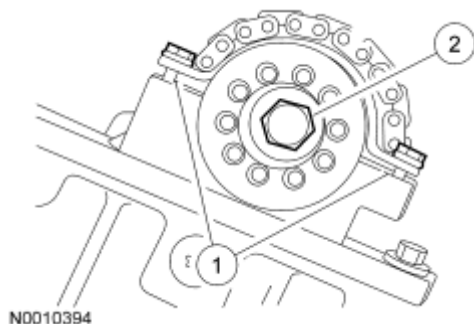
Identifying Camshaft Bolt & Clamp Bolts
